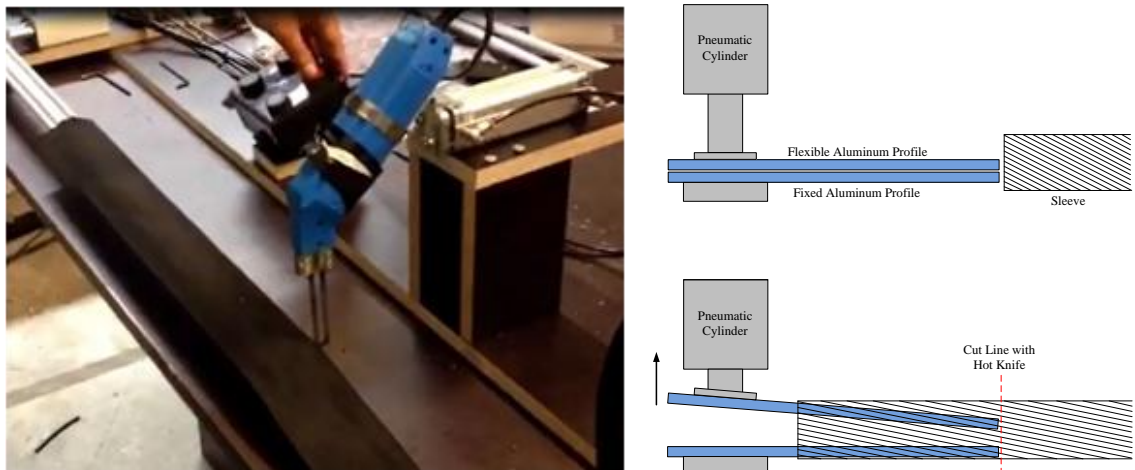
Using two aluminum rods to open up the sleeve sides.
